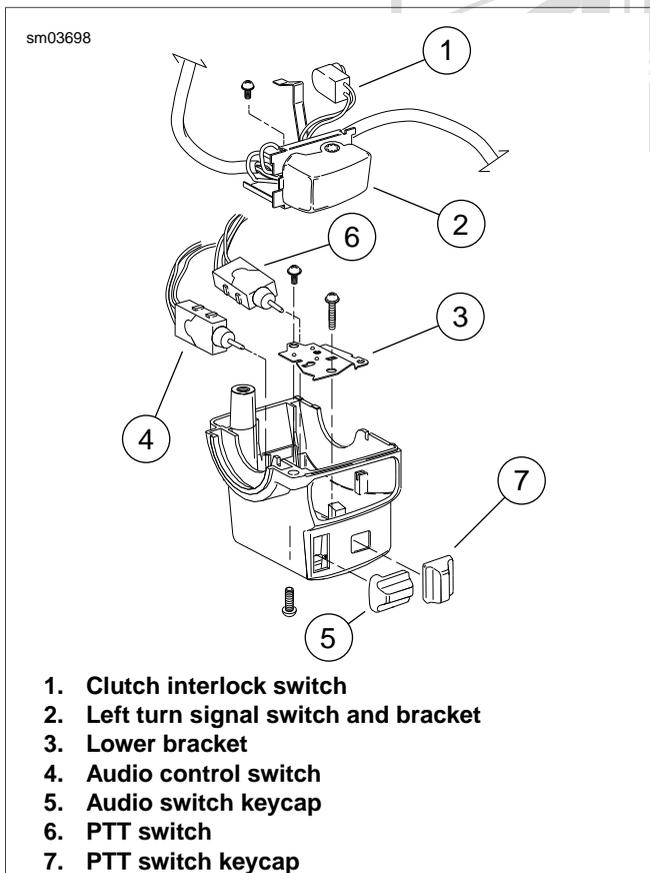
Lower Left Handlebar Switch Assembly (Ultra)
